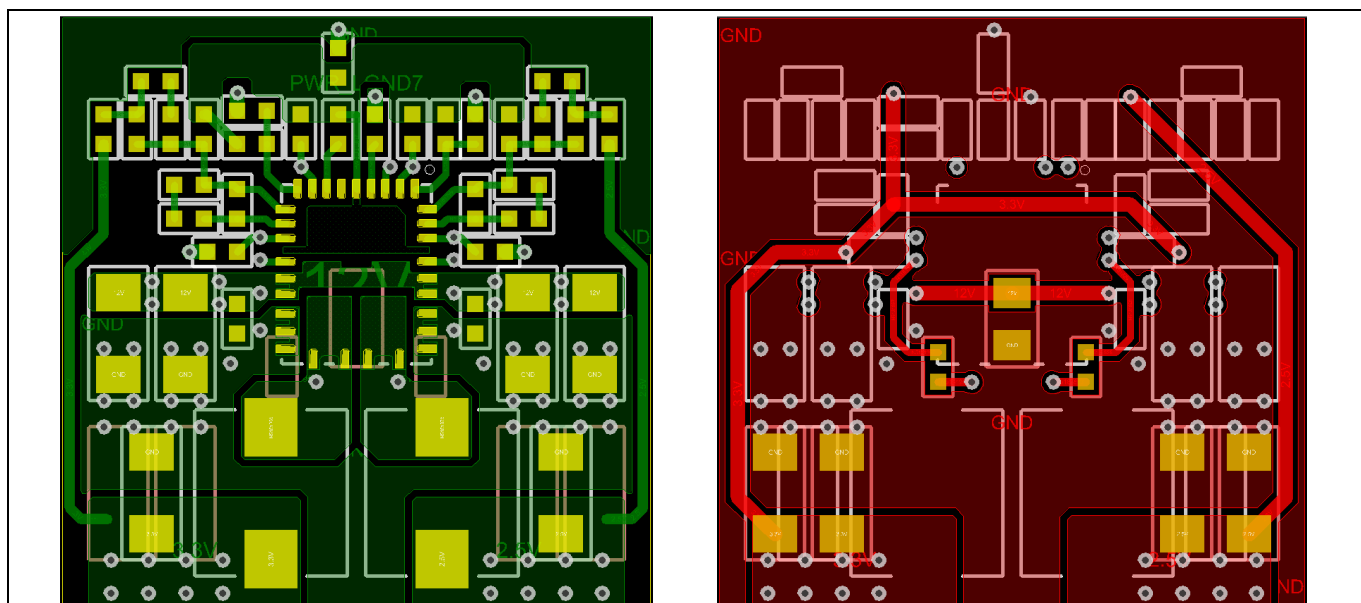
Top layer of the IR3892 macro layout (20 mm x 20 mm): Top (left) and Bottom (right)
